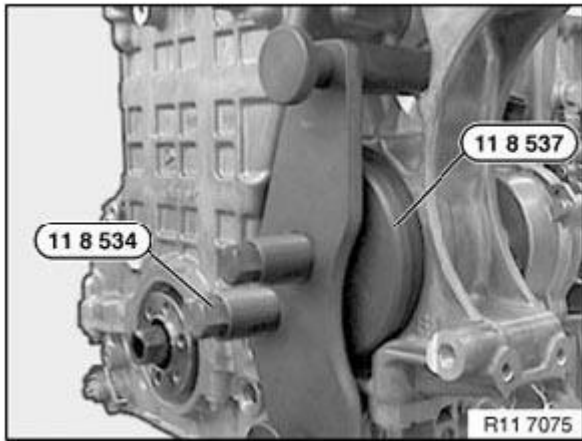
Identifying Special Tools (11 8 537, 11 8 534)
